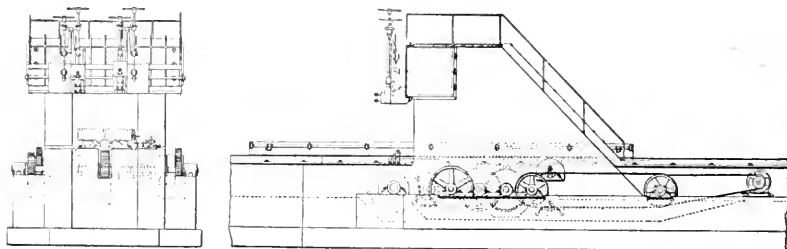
DETAILS OF REINFORCED-CONCRETE PLANING MACHINE
